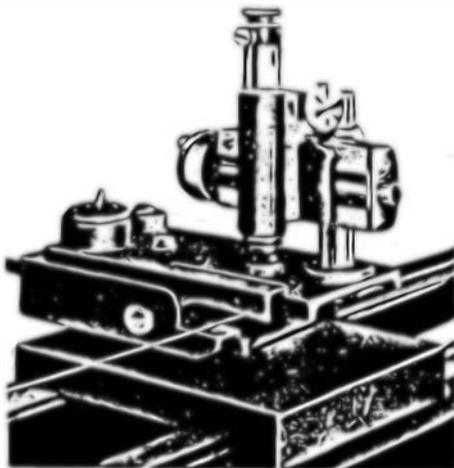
Method of Testing by means of a Taut Wire and Measuring Microscope
